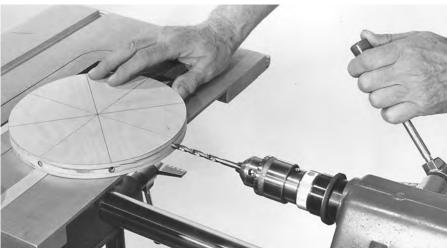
Using the pivot method to bore radial holes into the edge of a circular workpiece.
